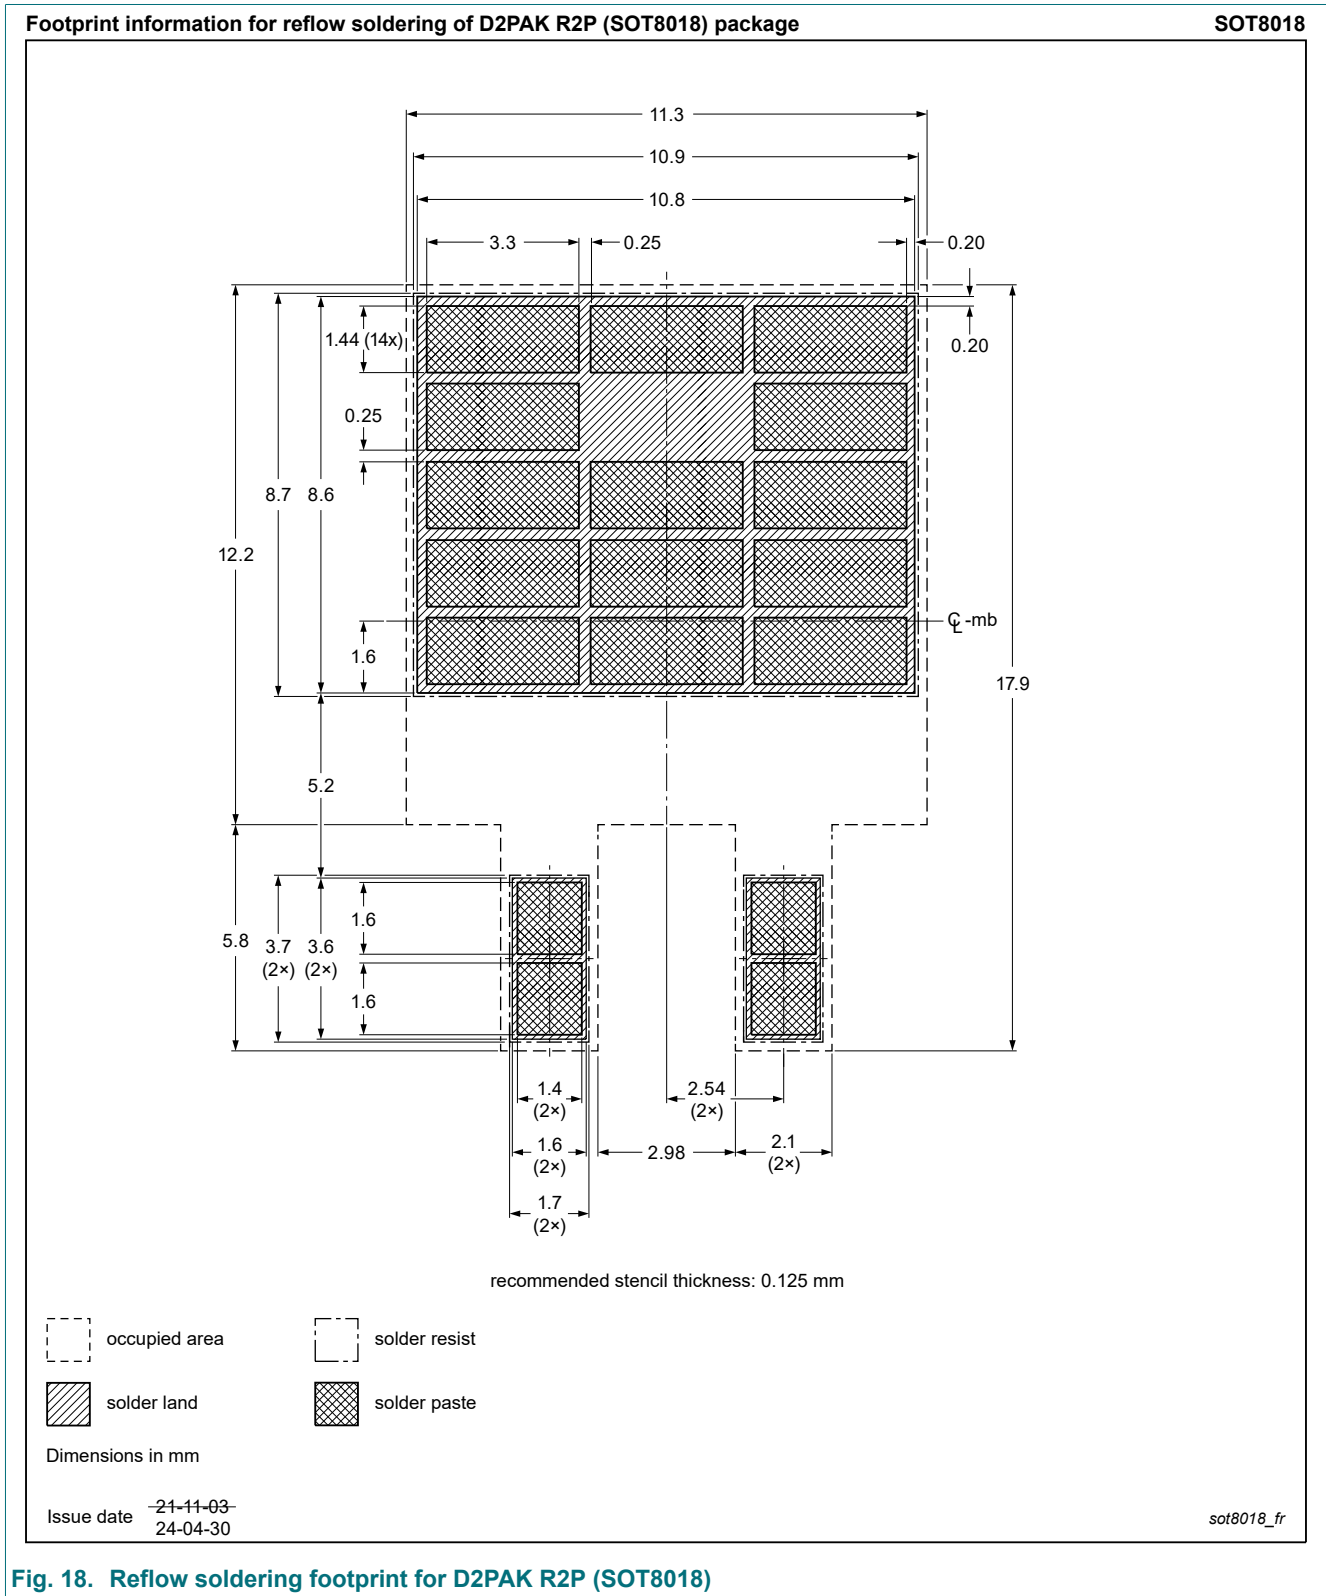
Reflow soldering footprint for D2PAK R2P (SOT8018)
